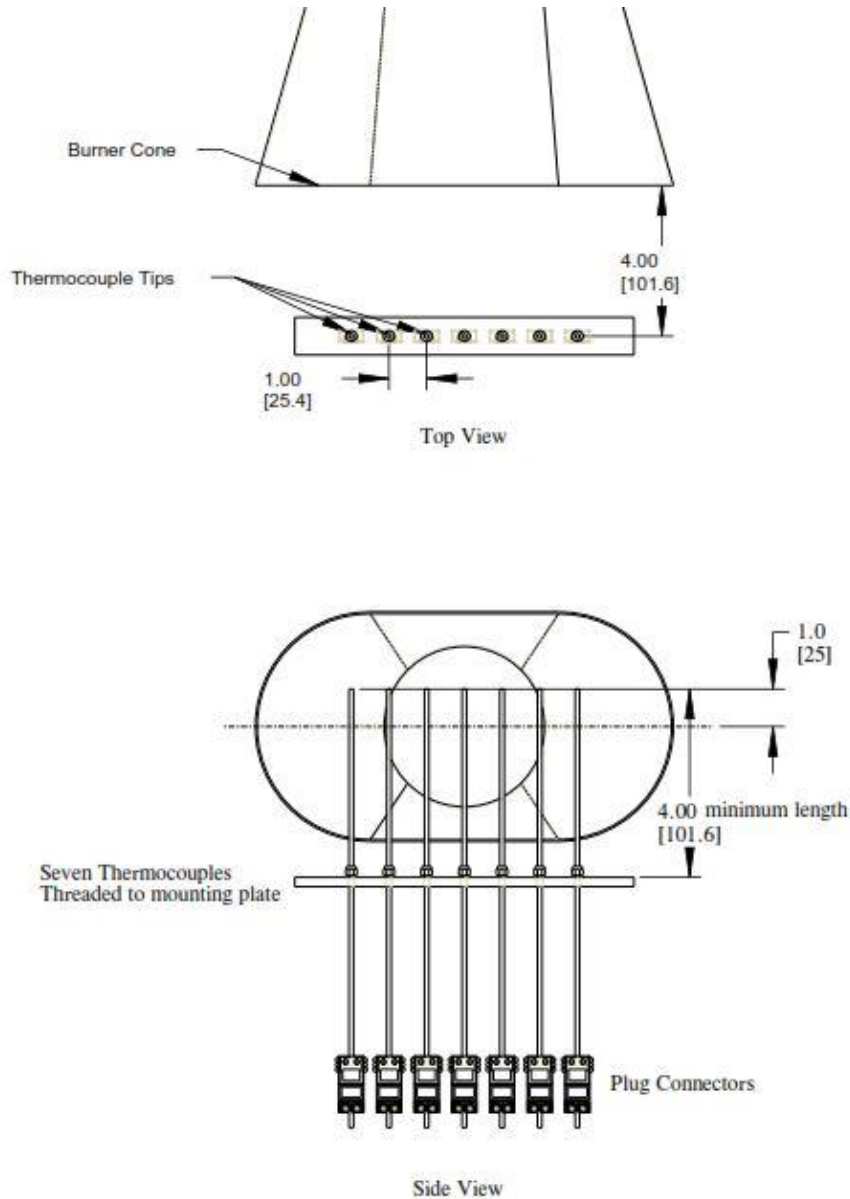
Top and Side View of Thermocouple Rake Bracket
